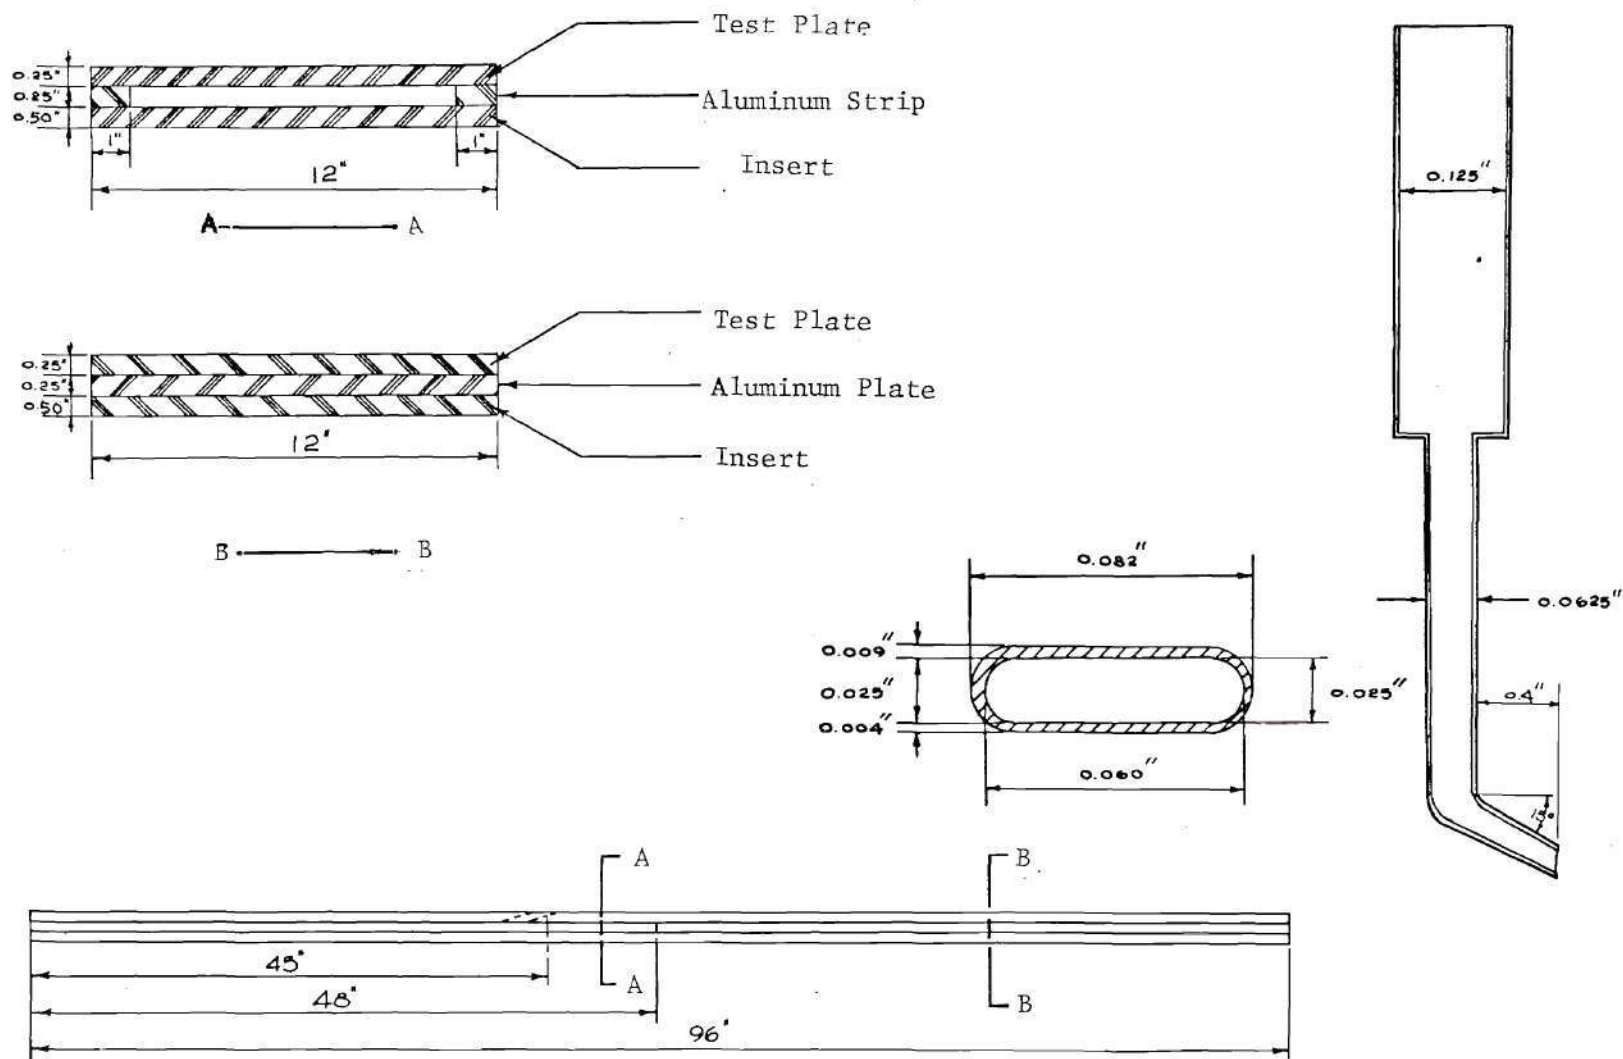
Detail of Test Plate Assembly and Pitot Probe
